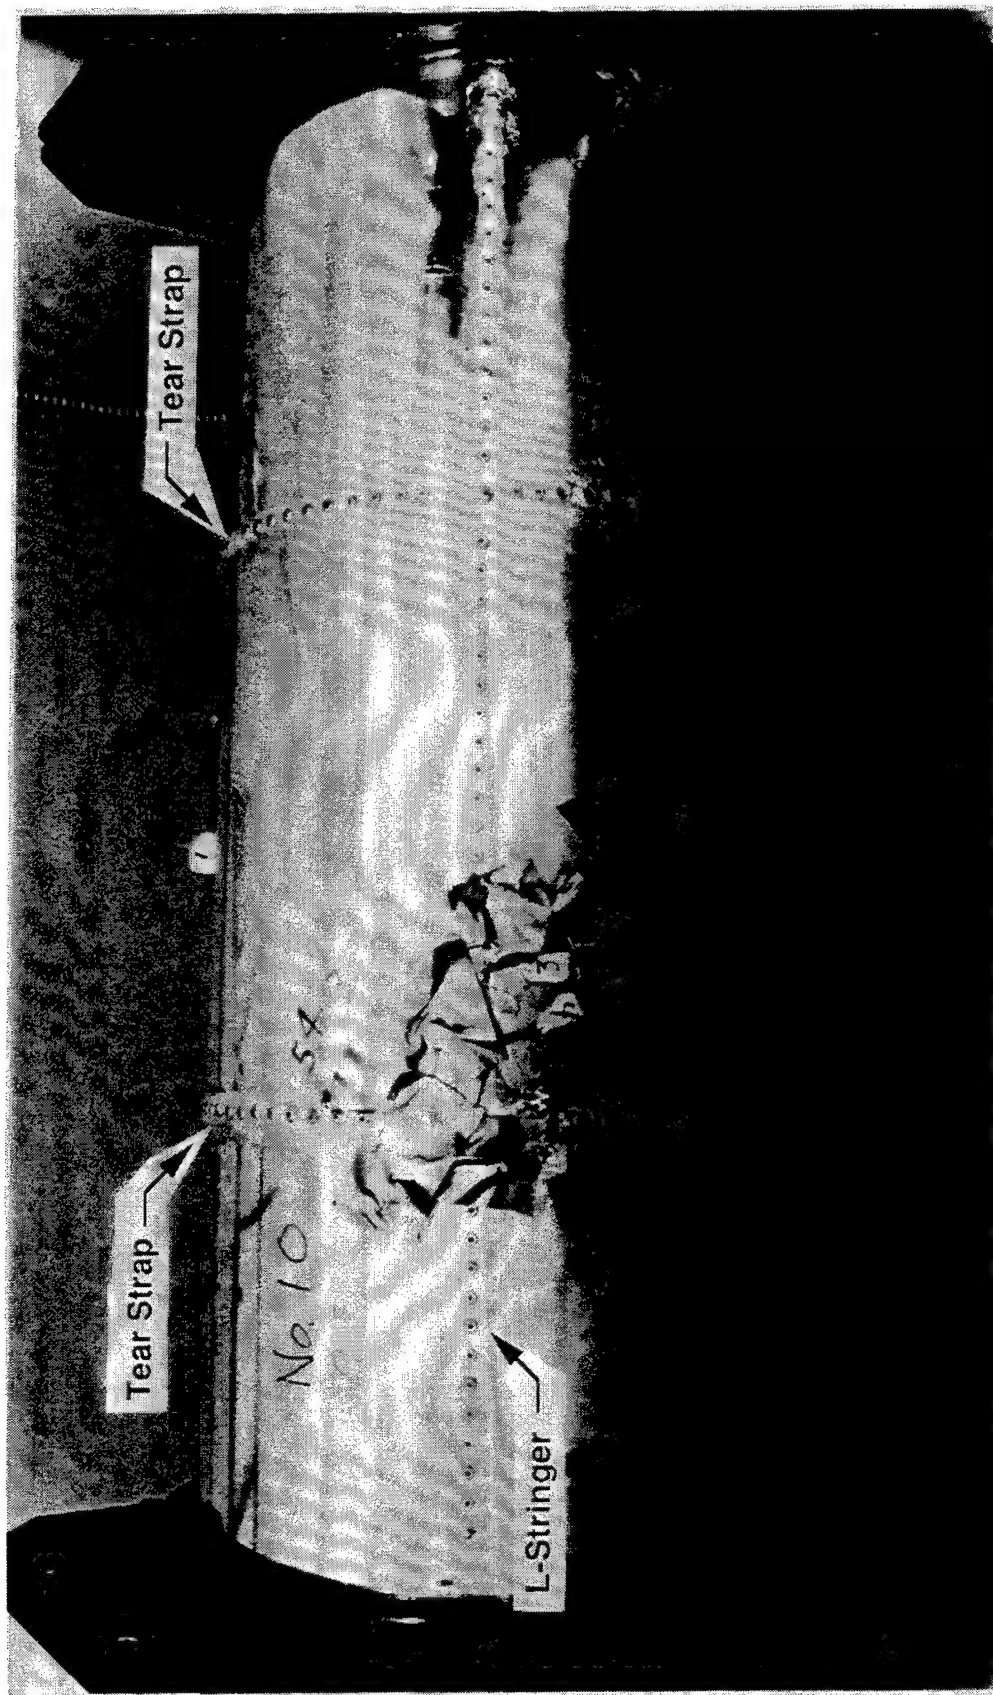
OUTSIDE VIEW OF SPECIMEN (TYPE C-3)
